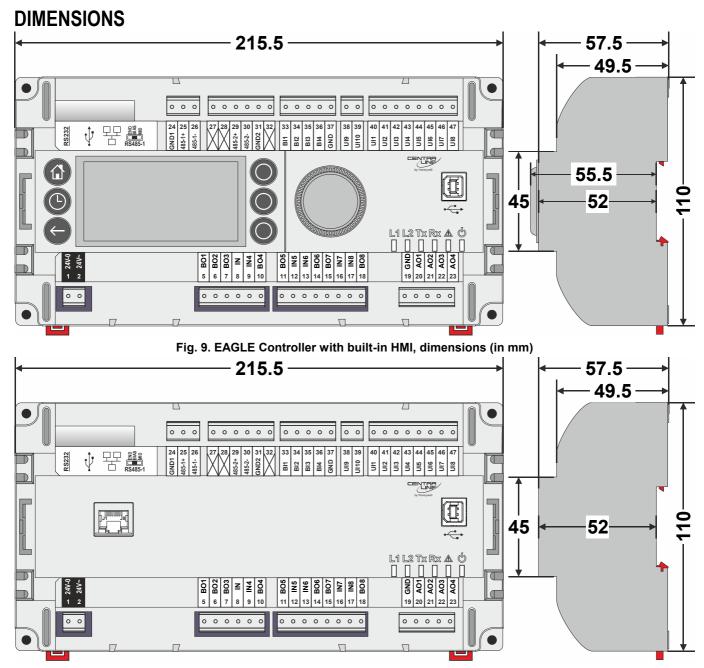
EAGLE Controller with RJ45 socket for connection of CLEAHMI21 External HMI, dimensions (in mm)
